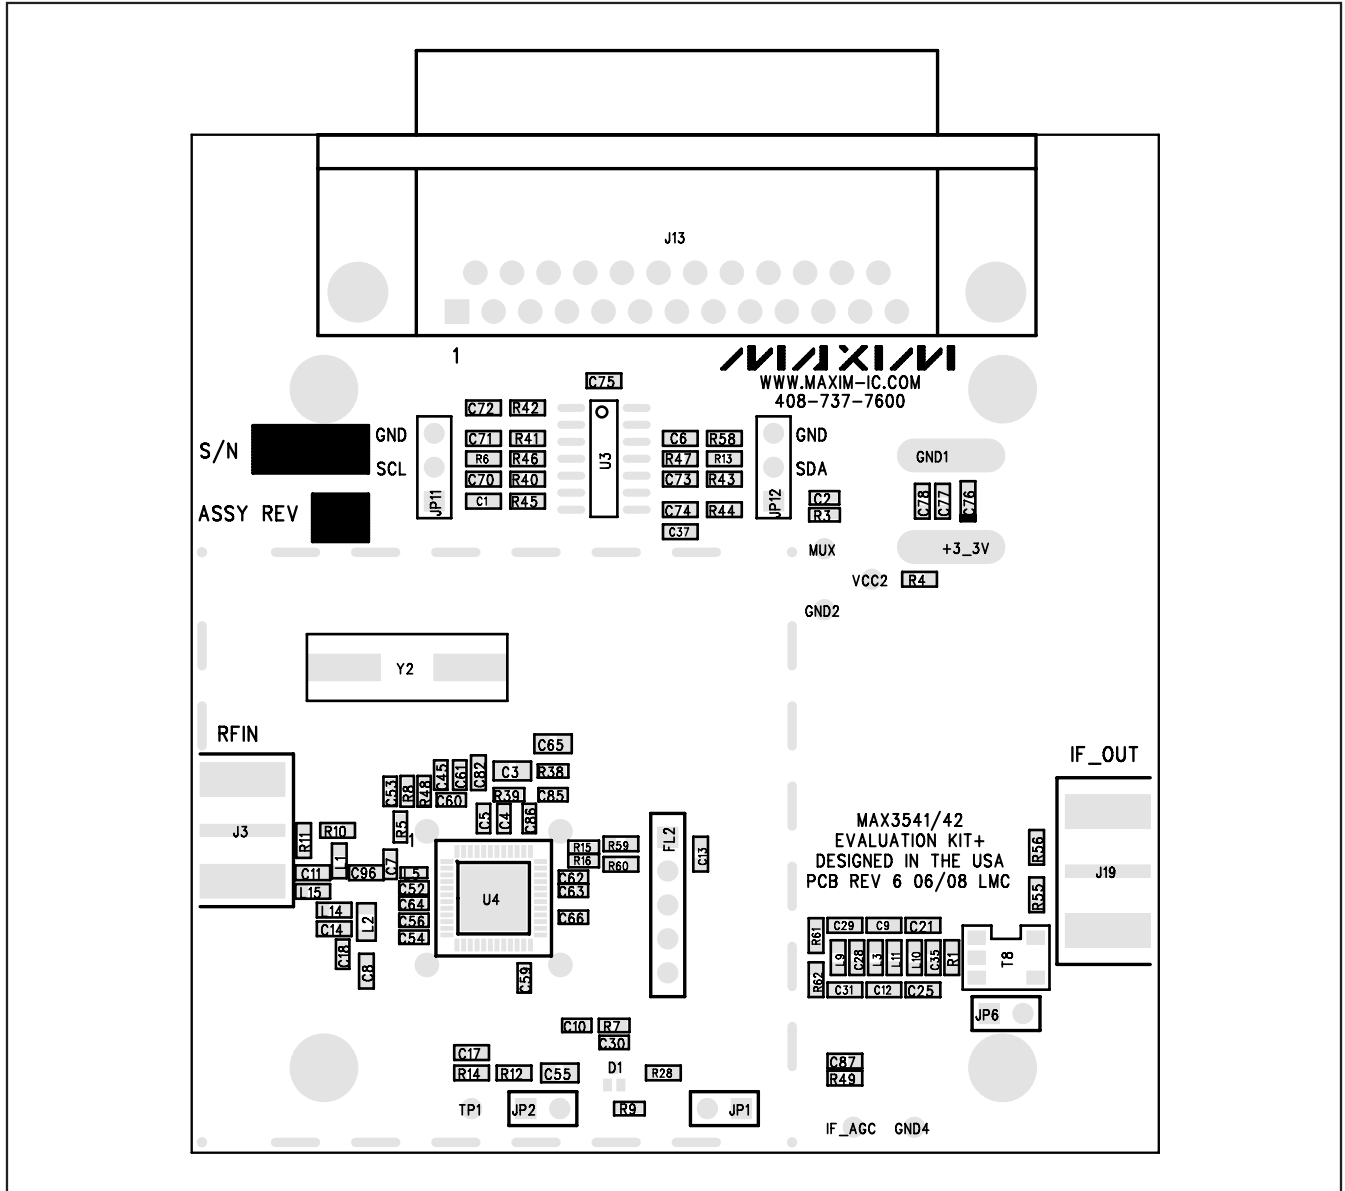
MAX3541/MAX3542 EV Kits PCB Layout—Component Placement Guide
